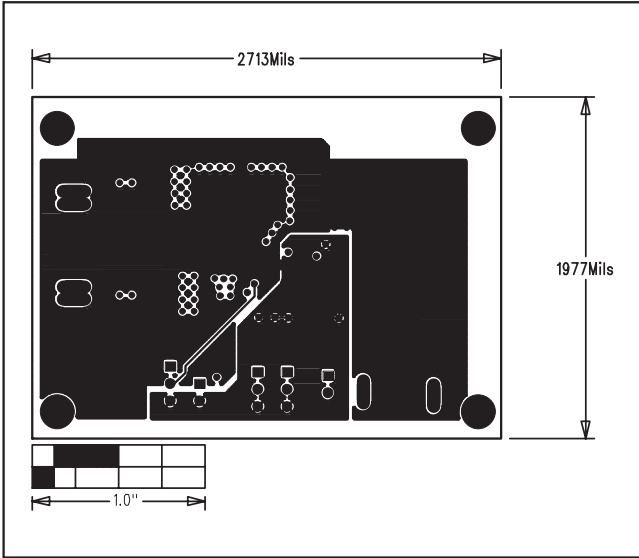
MAX8646 EV Kit PCB Layout—Layer 2
